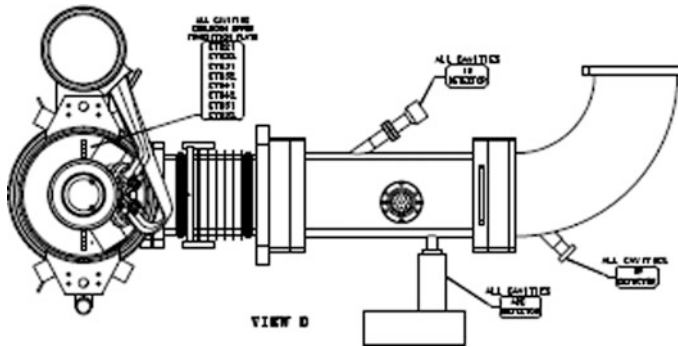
C100 FPC assembly with the cavity and helium circuits
